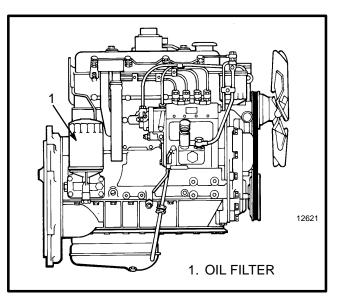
OIL FILTER ASSEMBLY, LATER PRODUCTION
